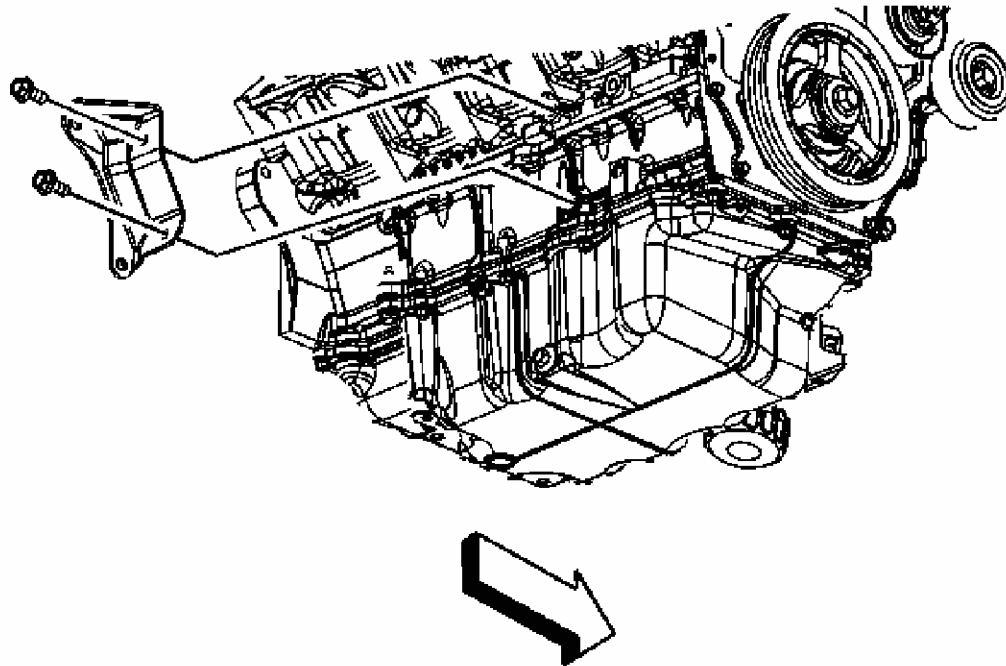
Identifying Transaxle Brace Bolts & Bolts
